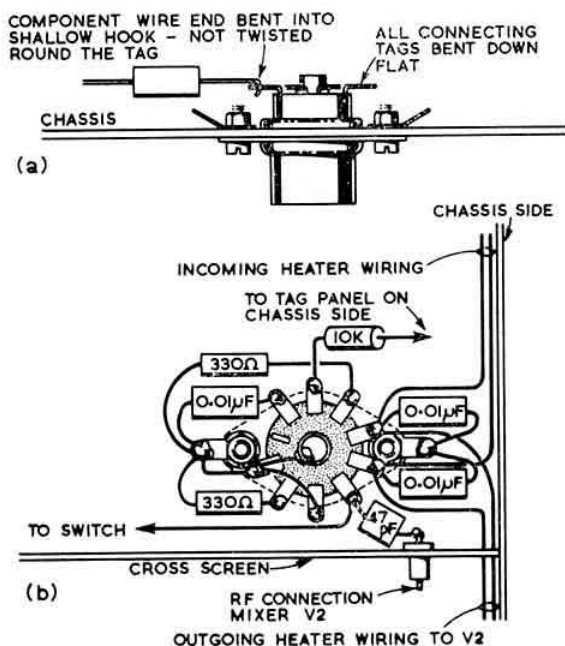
A preferred method of valveholder wiring and component assembly. The connecting tags are bent down flat as shown at "A." This spreads them out giving a larger circumference to the soldering points and therefore better accessibility. The components are spaced around the valveholder flat against the chassis top face and are earthed back to two separate earth points as shown at "B"; this layout ensures short connections, the minimum of intercoupling between components, and excellent accessibility for voltage testing or for removal of any parts. Heater wiring is run parallel (not twisted) close in against the chassis lip and through a hole previously cut in the chassis cross-screen.
